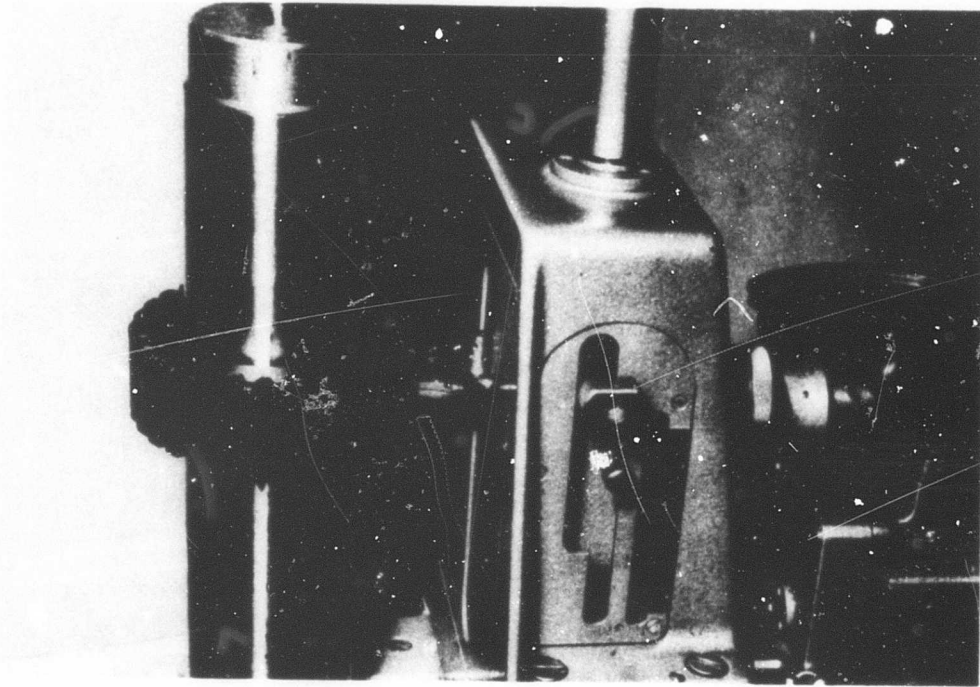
Measurement of Profile on the Planet Gear Performed by the Hofler Gear Measuring Machine.
